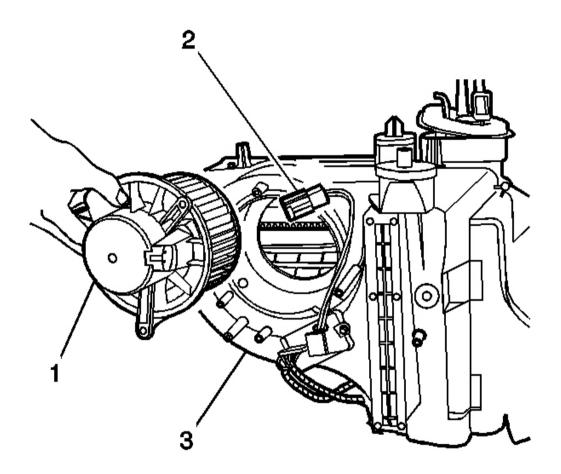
Blower Motor Assembly Courtesy of GENERAL MOTORS CORP.
